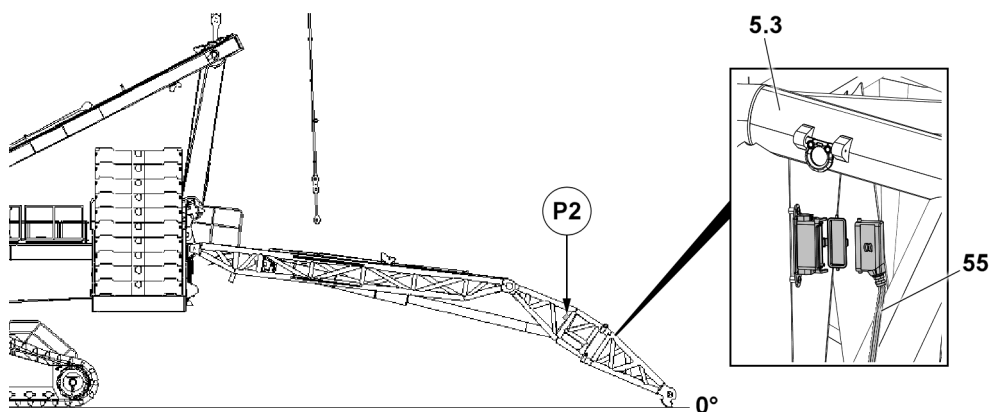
Disconnect the electrical connection of the suspended ballast guide to the end section:
